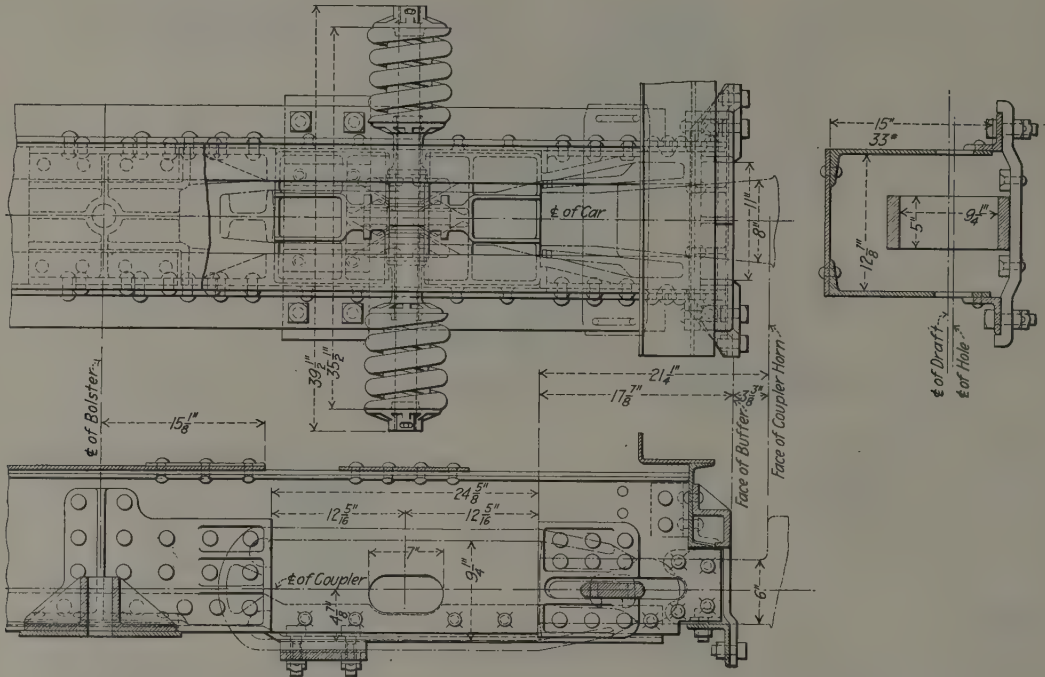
Cardwell Friction Draft Gear Type G Class 18-A. Union Draft Gear Company.
